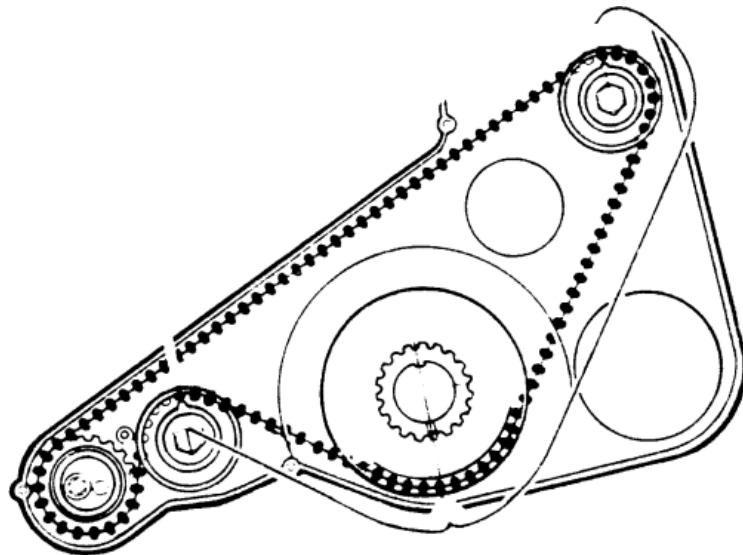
Check the alignment of the balance shafts and crankshaft before tightening the tensioner
